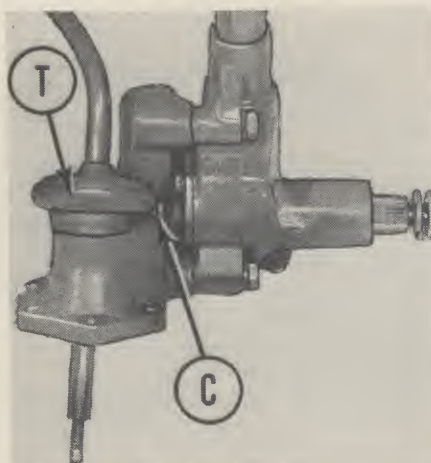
Steering backlash adjustment screw (C) is not accessible until gear unit is separated from gear shifter tower (T).
